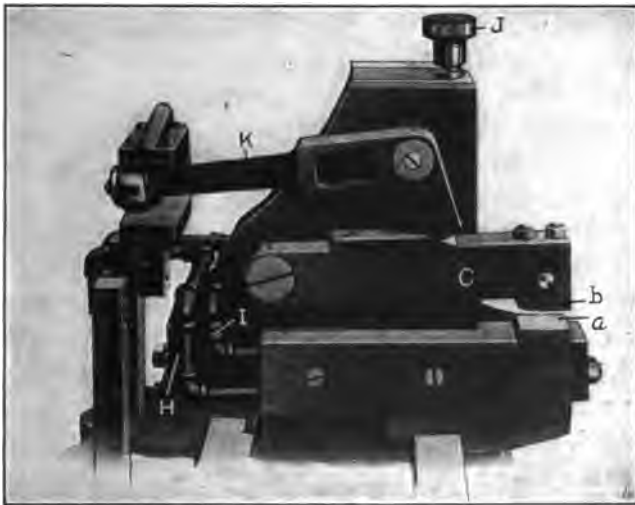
Details of Clamping Jaws used on Machine shown in Fig. 6
